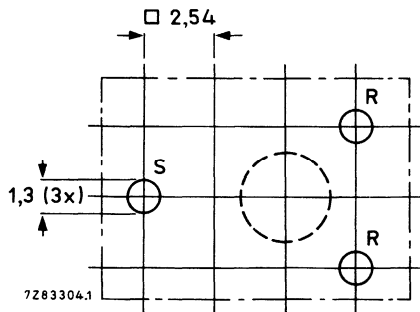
Hole pattern; the large hole is necessary only if bottom adjustment is to be used. R = rotor, S = stator.
